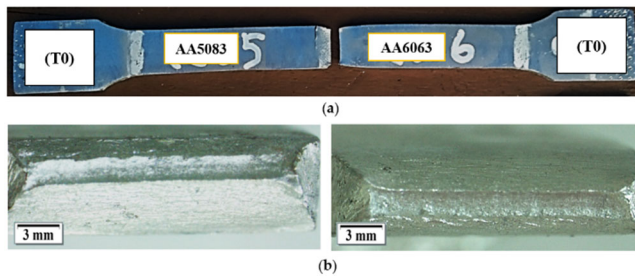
a) Fractured specimen T0; b) Macrostructure of the fracture surface of T0
